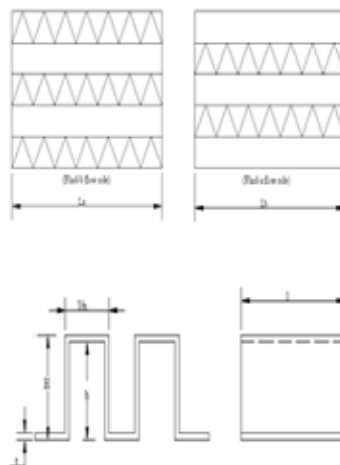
Front view and side view of plate-fin heat exchanger and offset-strip fin.
